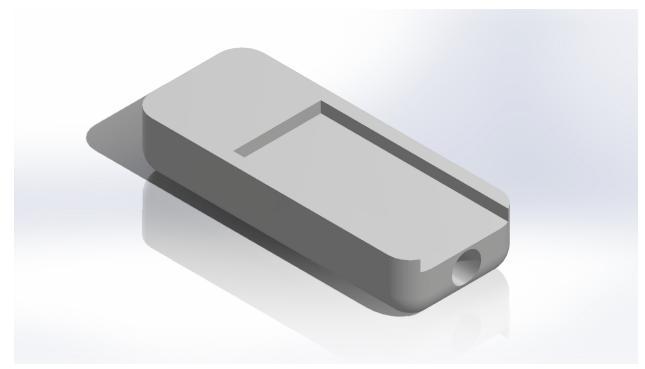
Remote Control Case SolidWorks drawing [by Gianna Inga]
